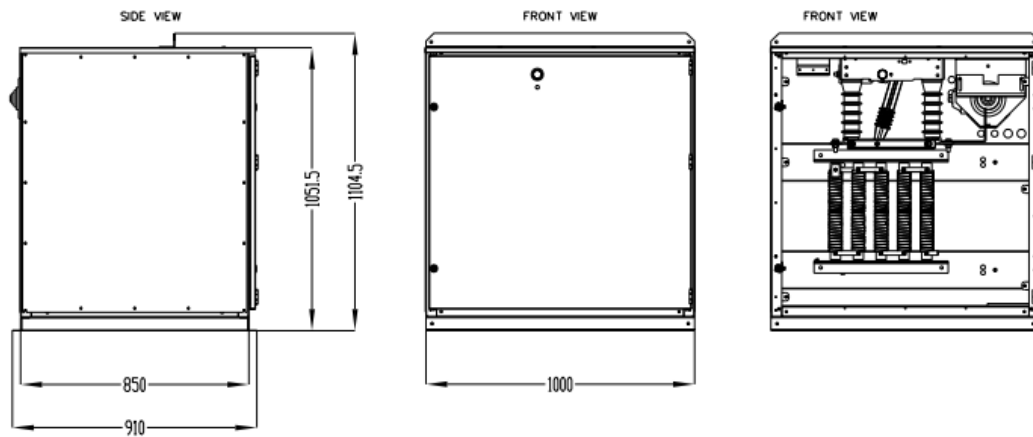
Neutral point cubicle drawing & dimensions example /6/.
